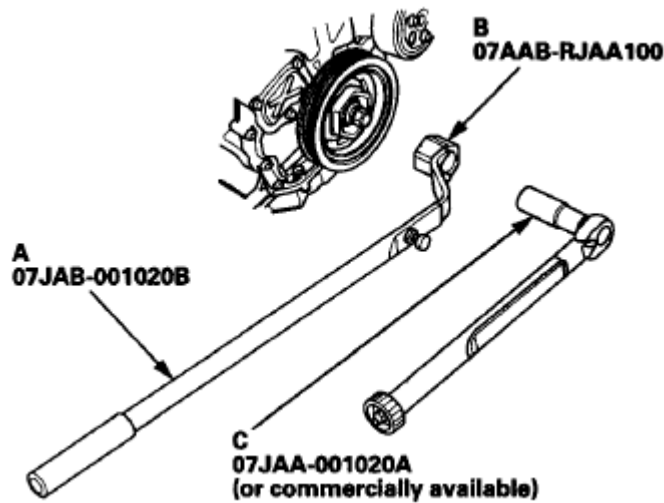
Identifying Holder Handle And Crankshaft Pulley Holder
